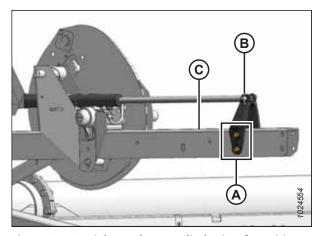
Right Reel Arm Cylinder in Aft Position
